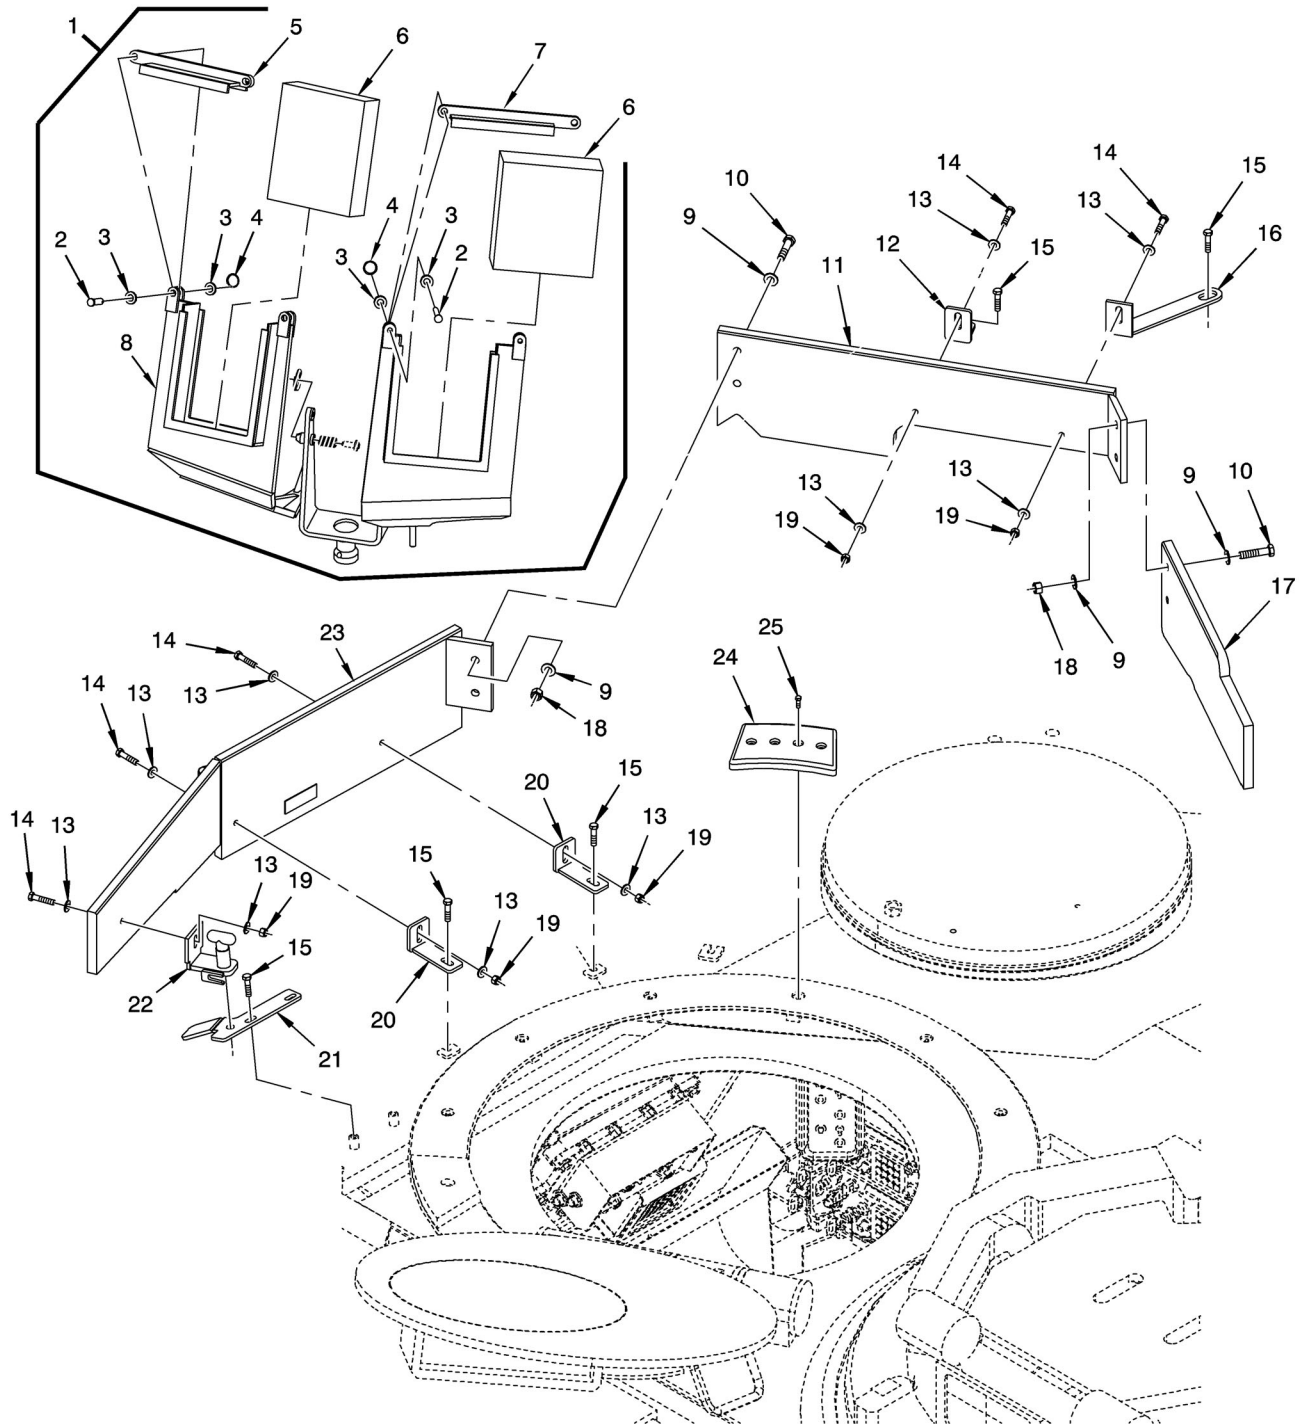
F05. DRIVER'S HARNESS SYSTEM, BRACKETS, RETRACTORS, KNIFE, AND RELATED PARTS
